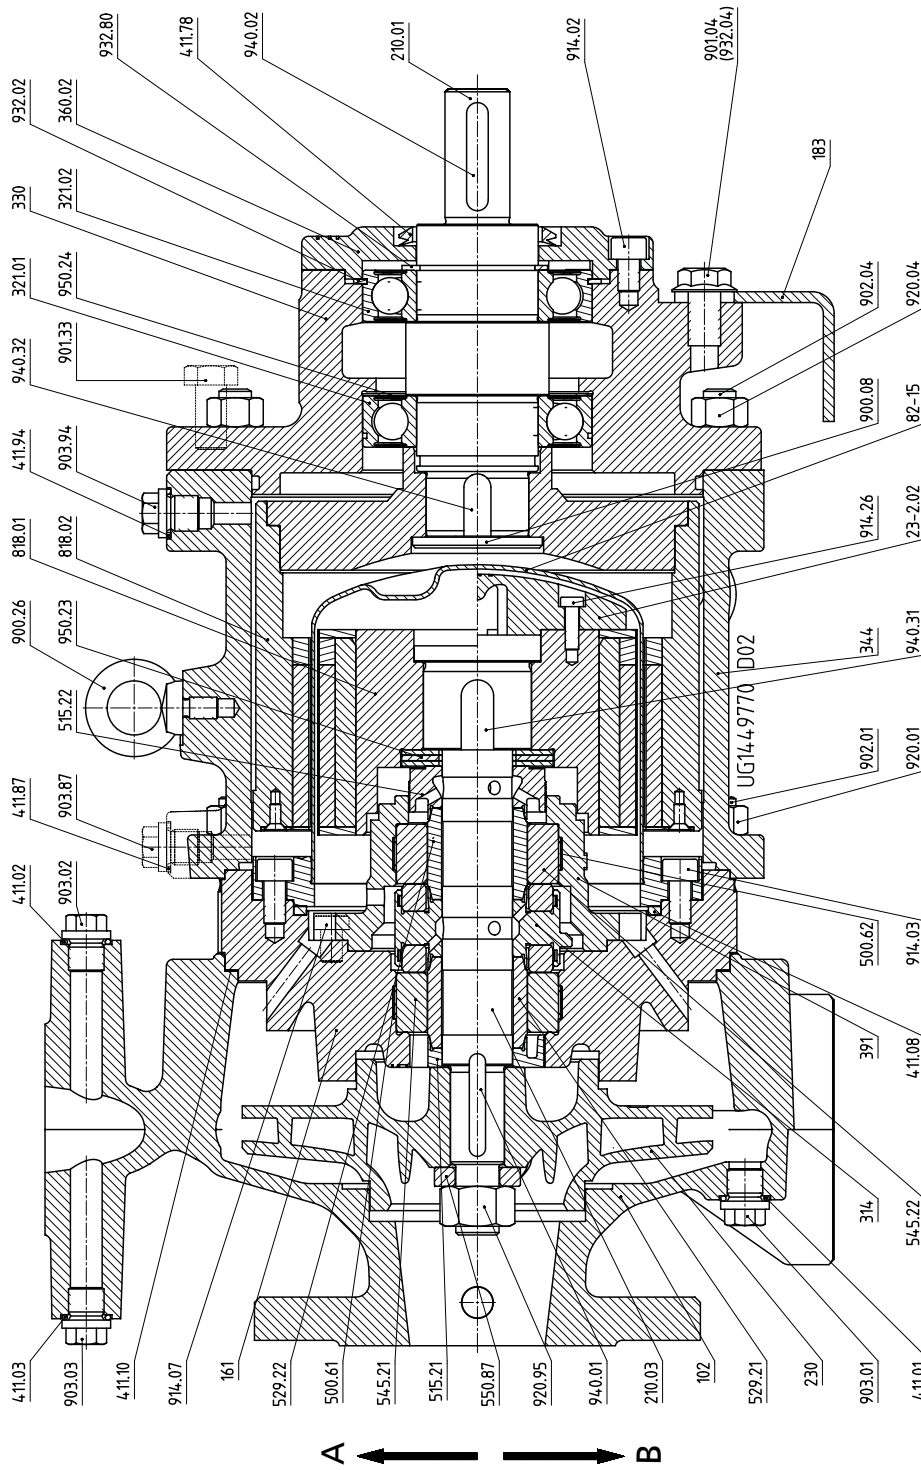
General assembly drawing of model with clamped cover, without intermediate piece
